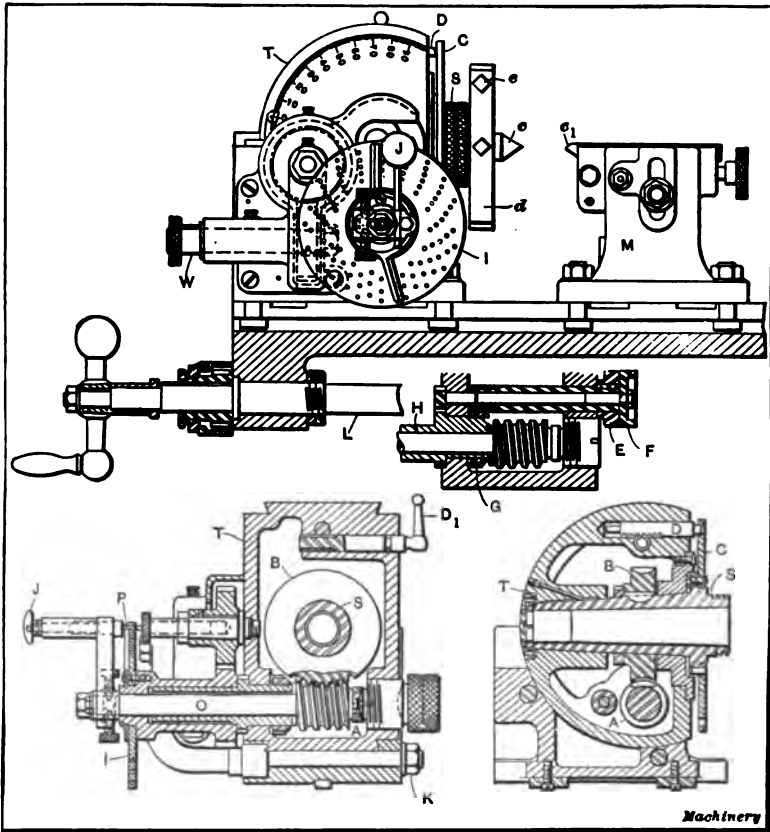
Spiral Head used for Spiral Milling and Indexing
